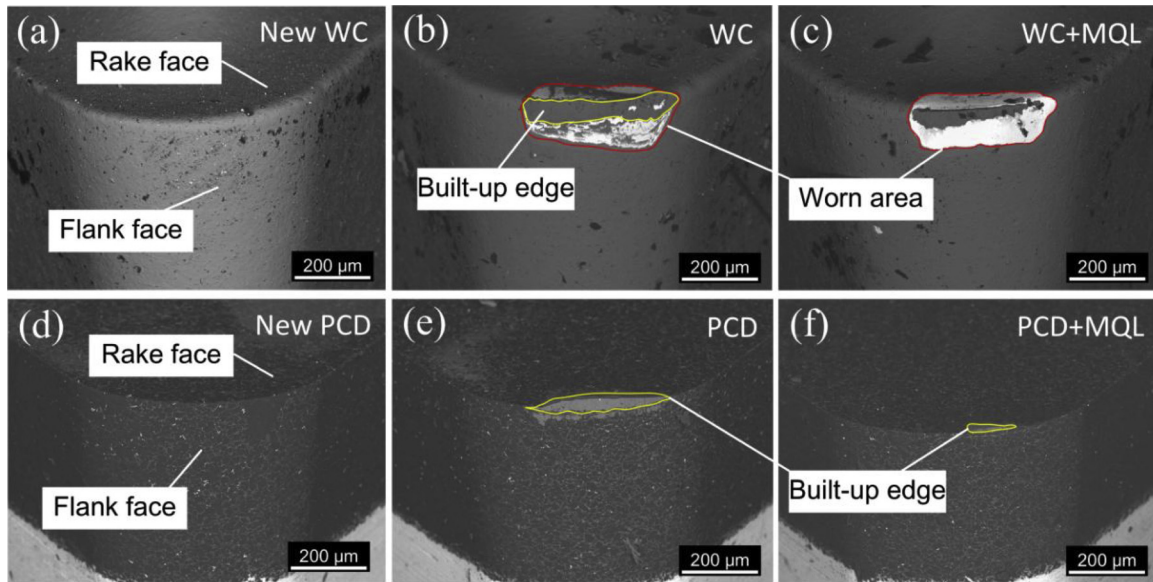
SEM images of tool wear: (a) WC tool before machining; (b) WC tool after dry turning; (c) WC tool after turning with MQL; (d) PCD tool before machining; (e) PCD tool after dry turning; (f) PCD tool after turning with MQL.
